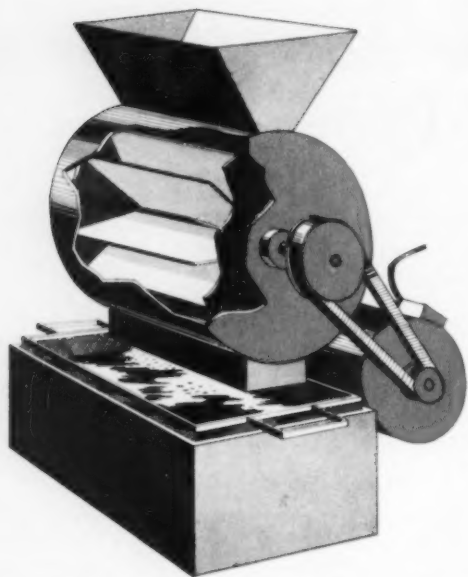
Sketch of the impeller-type separator as used at the Tin Research Institute. The circular side plates of the impeller have a minimum clearance (about 0.060 in.) from the sides of the casing. The clearance between the ends of the blades and the casing is 1 in. The impeller is 10 in. in diameter and is driven at between 575 and 1,350 r.p.m.
